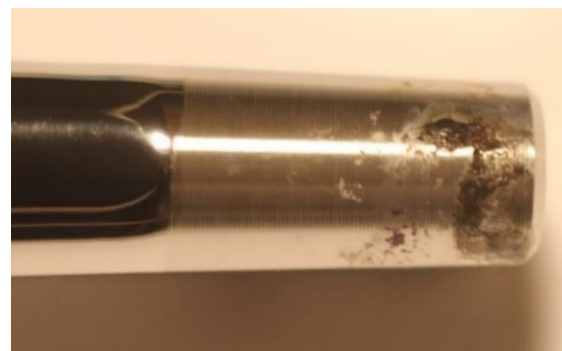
Advanced fretting associated with corrosion damage on the anterior surface of a hand-assembled CoCrMo neck following a fatigue test.
